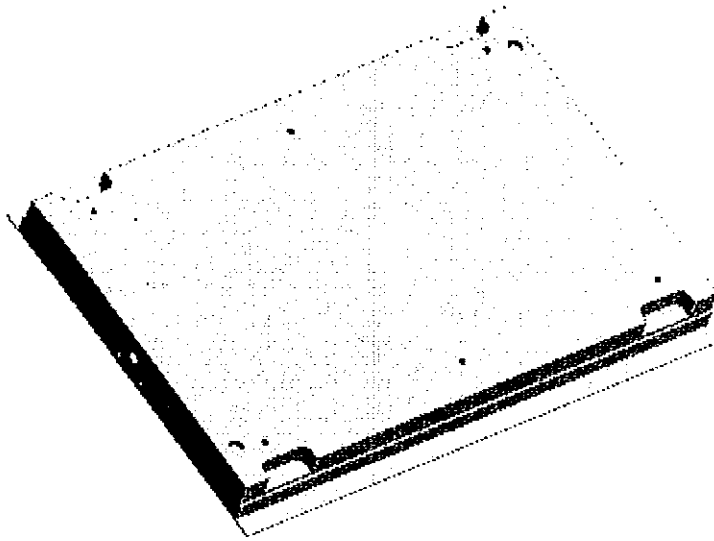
and 7.9 show the moulded parts and the mould itself. In figure 7.8 it can be seen where the screws are placed that hold the part together. Some of the supports for holding the components in place within the device can also be seen. Figure 7.9 shows how both the top and bottom part are made simultaneously from the same mould. The top half of the mould creates the outer sides of the parts while the bottom half of the mould creates the inner parts of the mould. Figure 7.10 shows how the mould looks when the top and bottom halves are placed together.
